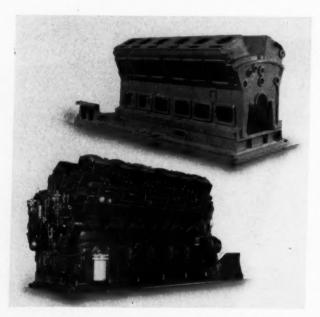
Cylinder block and base of this diesel engine are steel castings shown at upper left
